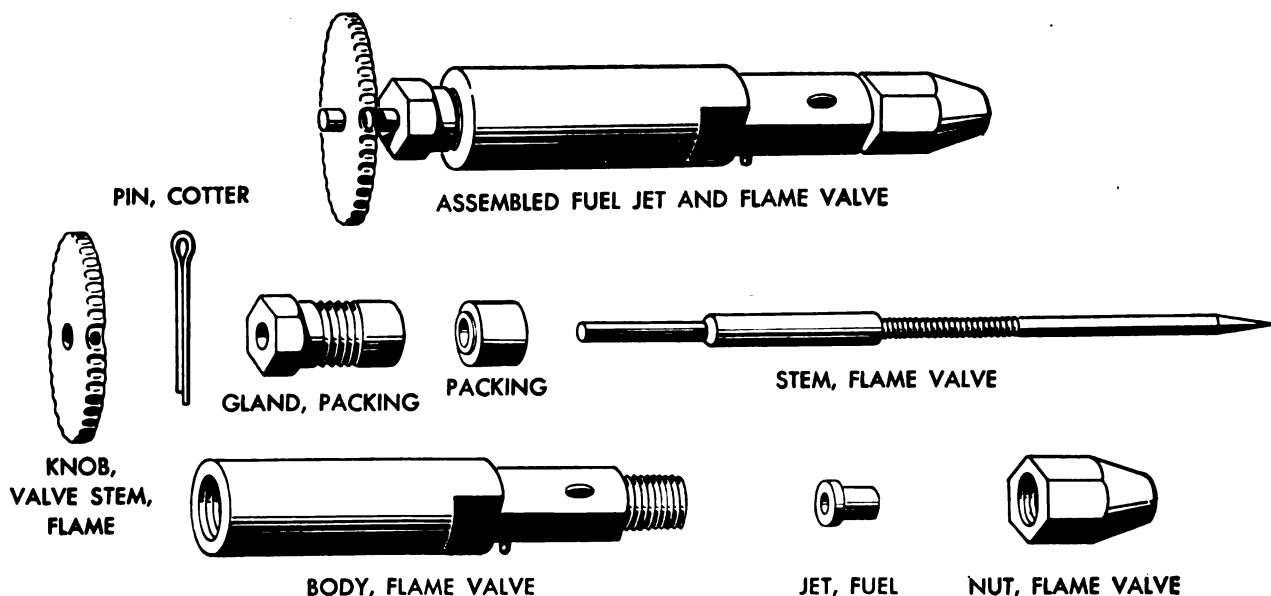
Fuel jet and flame valve assembly, unit, fire, M1937.
